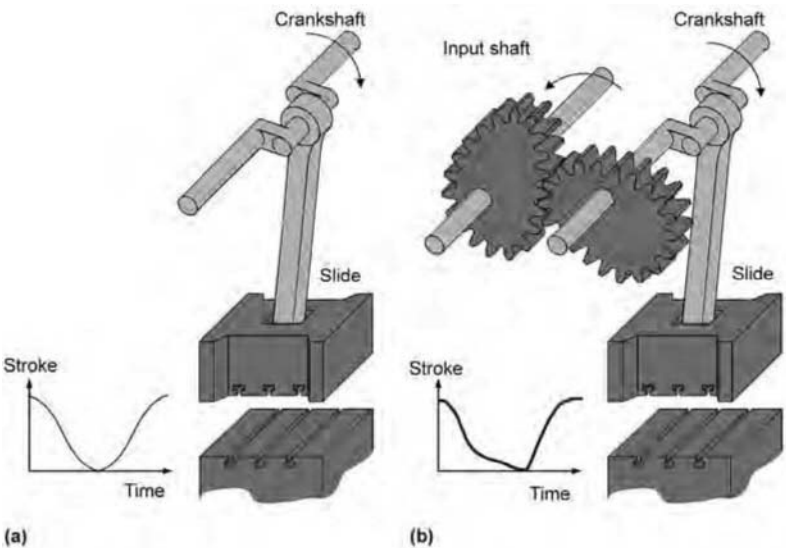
(a) Simple crank drive, (b) slide motion can be changed with noncircular gears. Adapted from Ref 10.3
